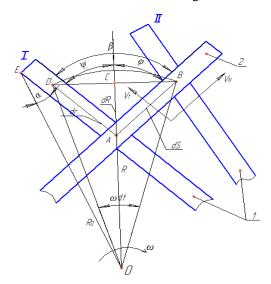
Model of interaction of rotor and stator knives: 1 - rotor knife; 2 - stator knife.
